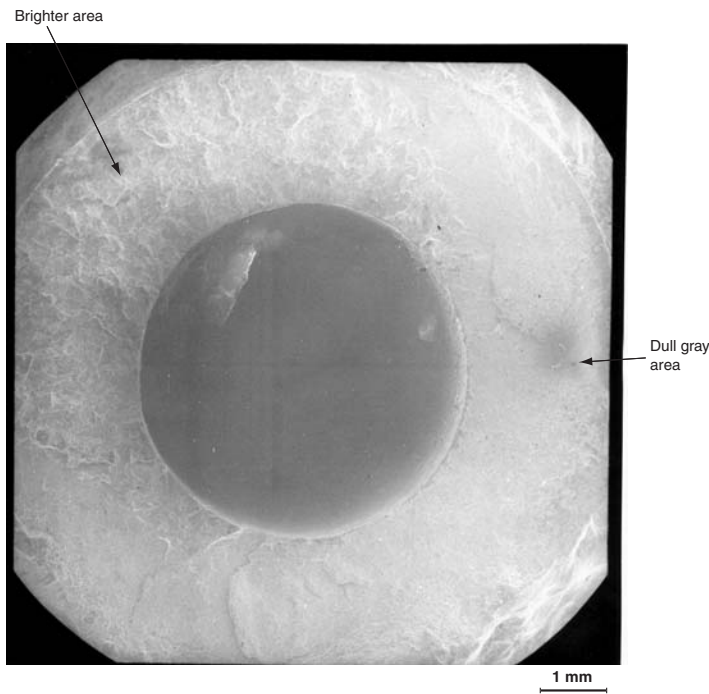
Fracture surface of the hinge pin
